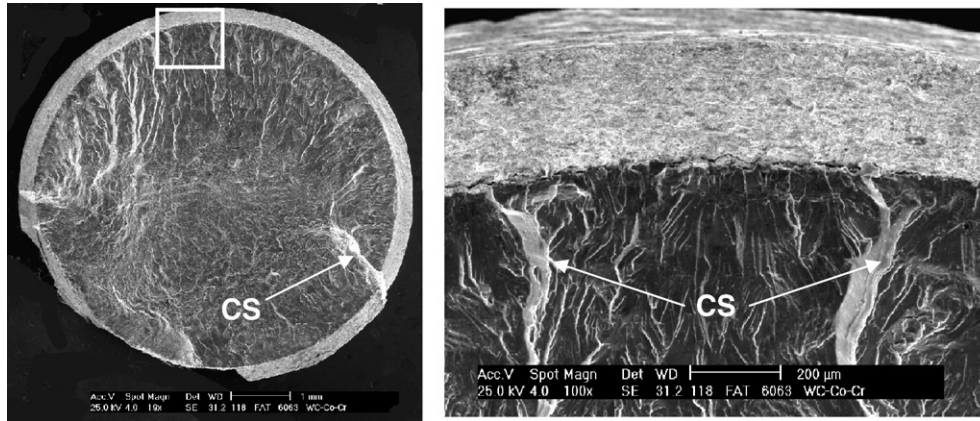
(a) Fracture surface of fatigue coated sample tested at 118 MPa, which failed at  $\sim 19.5 \times 10^6$  cycles. The presence of a number of cleavage steps and extensive delamination of the coating are clearly visible. (b) Detailed view of the area indicated in (a), showing a crack nucleation site. Cleavage steps (CS) are also identified.
